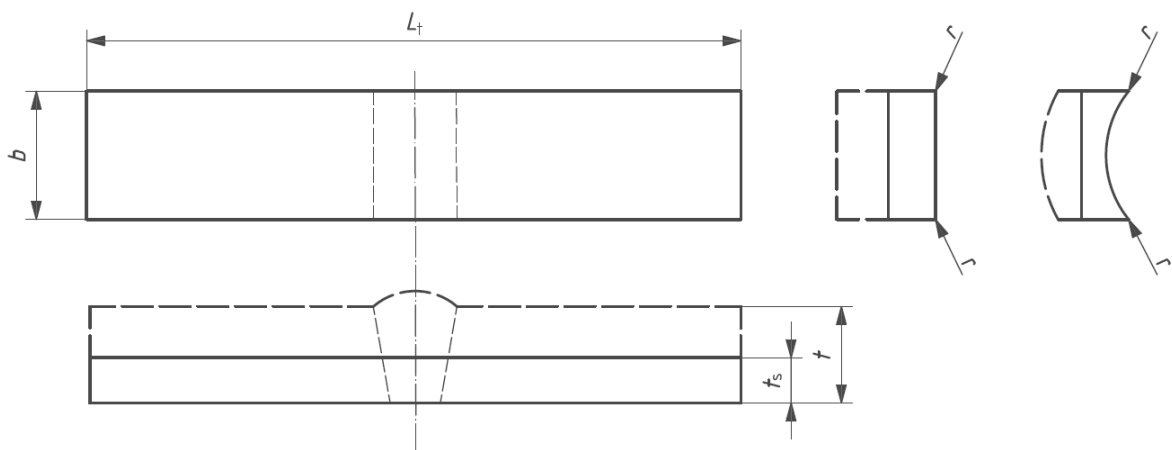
Transverse root bend test specimen for a butt weld (TRBB).
